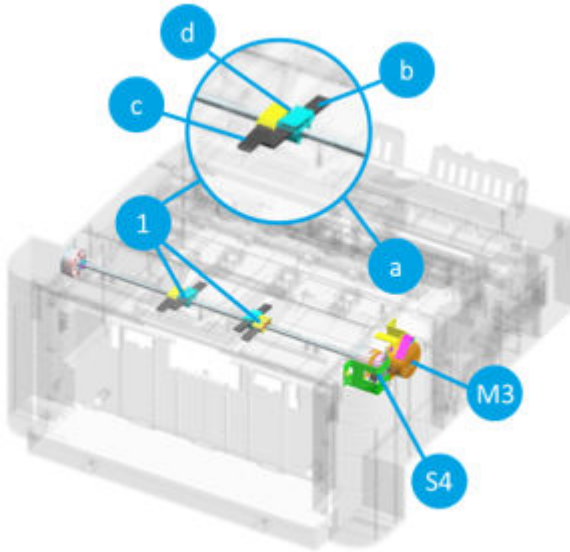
Inner finisher system - paddle unit driving system overview (sub paddle unit)
